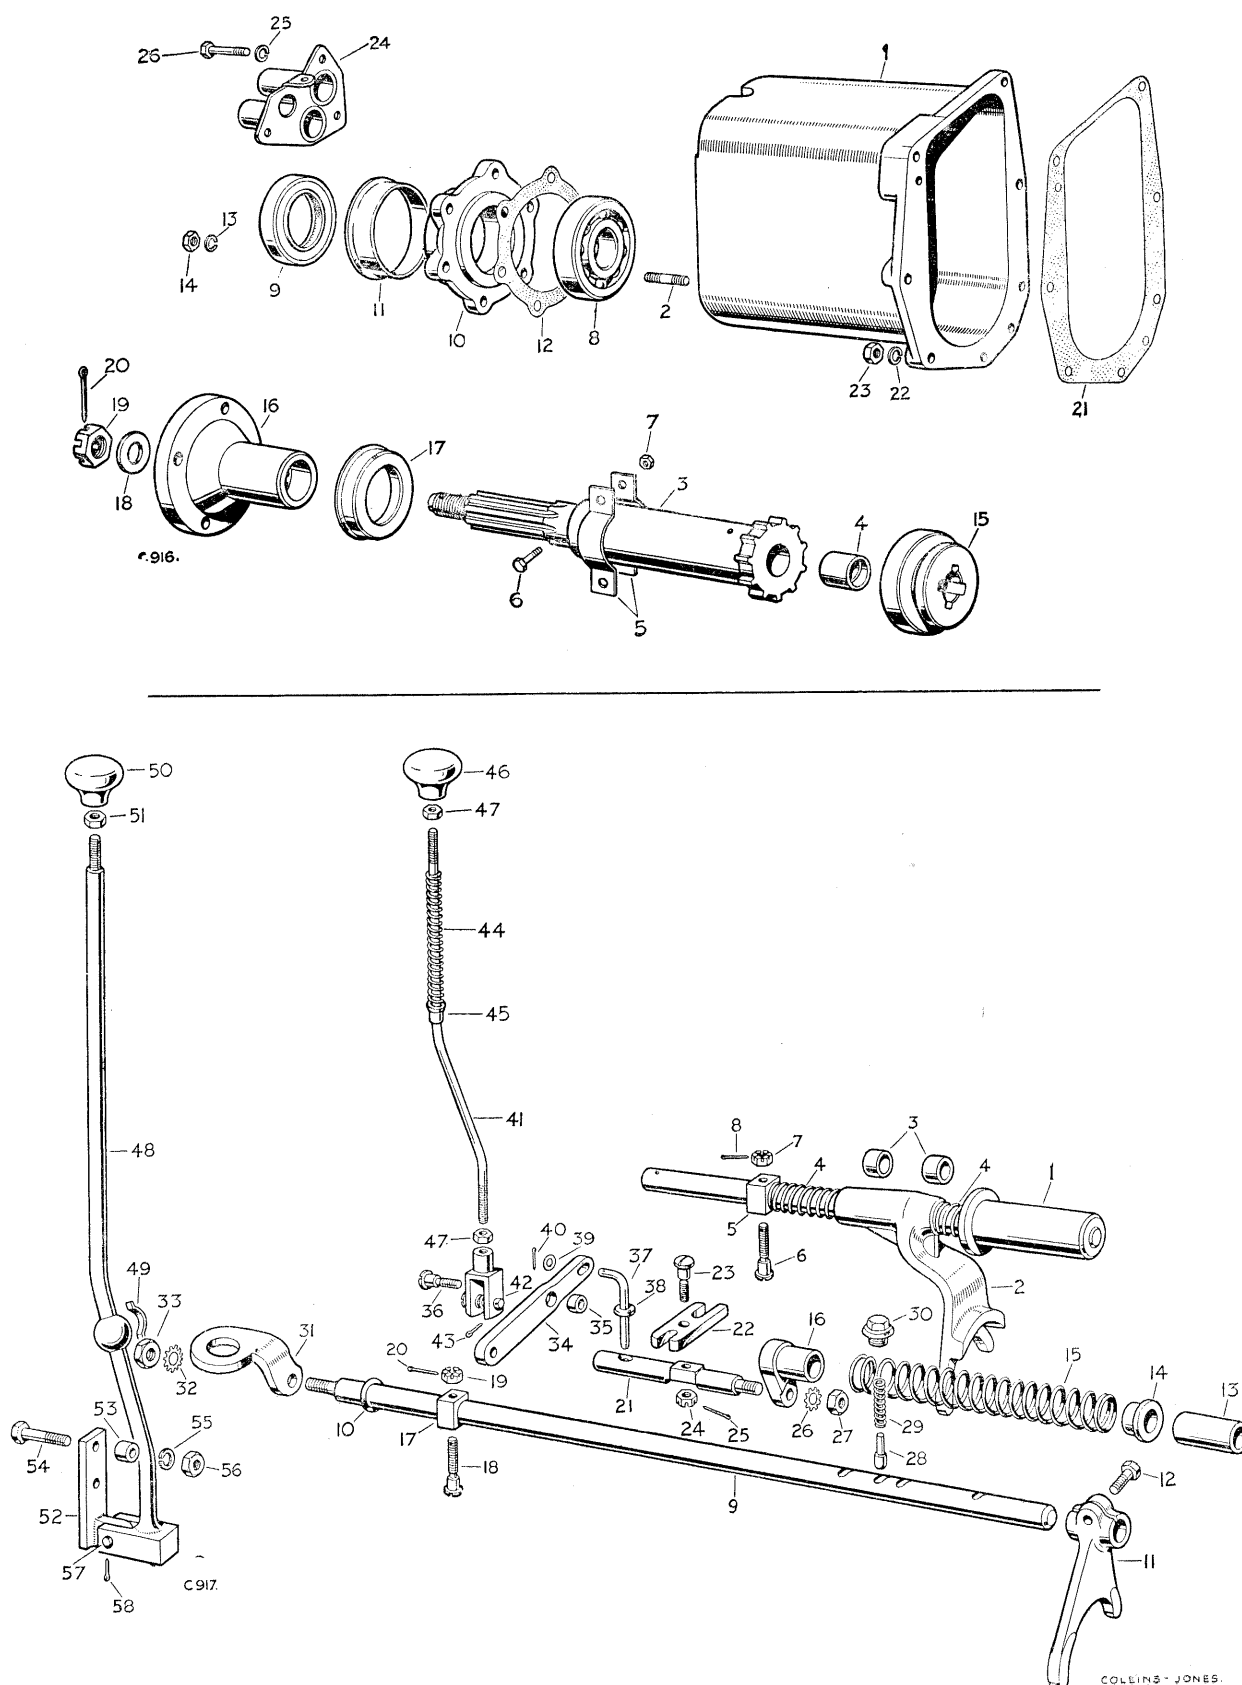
Layout of the gearbox unit: front wheel drive, transfer gear controls and front output shaft and housing
